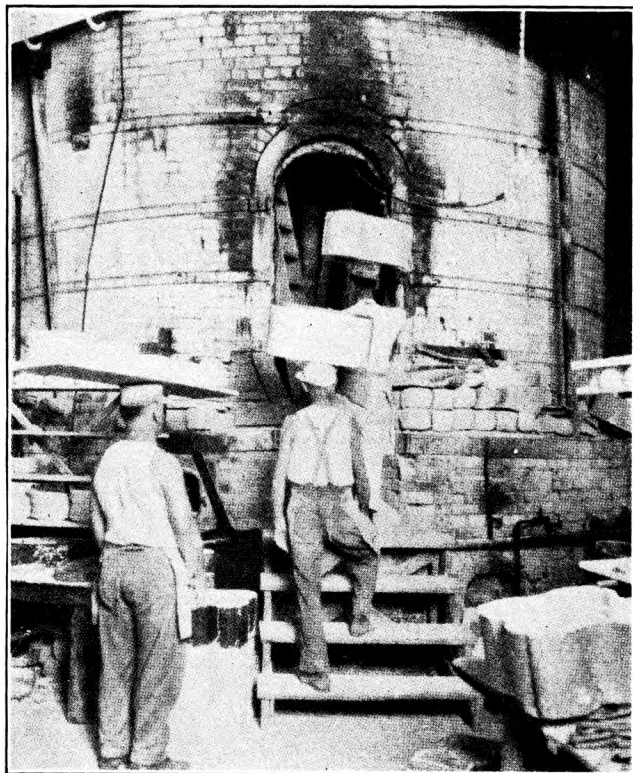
TWO PLACERS, EACH WITH A FILLED SAGGER ON HIS HEAD, ABOUT TO ENTER KILN; AT LEFT, A PLACER WITH BOARD OF WARE ON HIS HEAD CARRYING WARE TO PLACING BENCH
